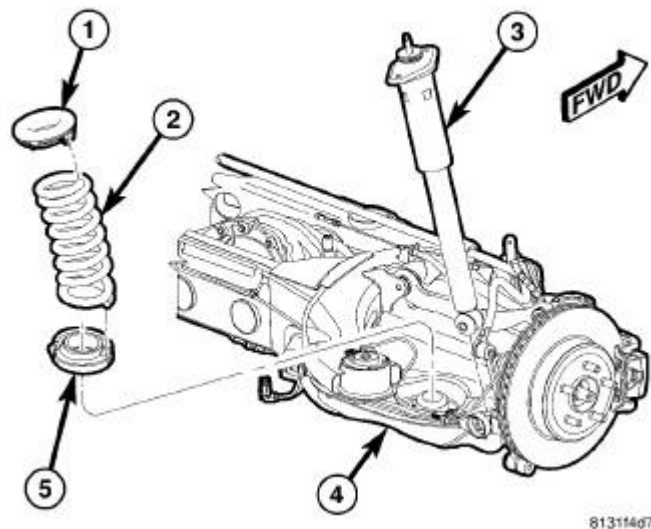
COIL SPRING AND SHOCK ASSEMBLY
